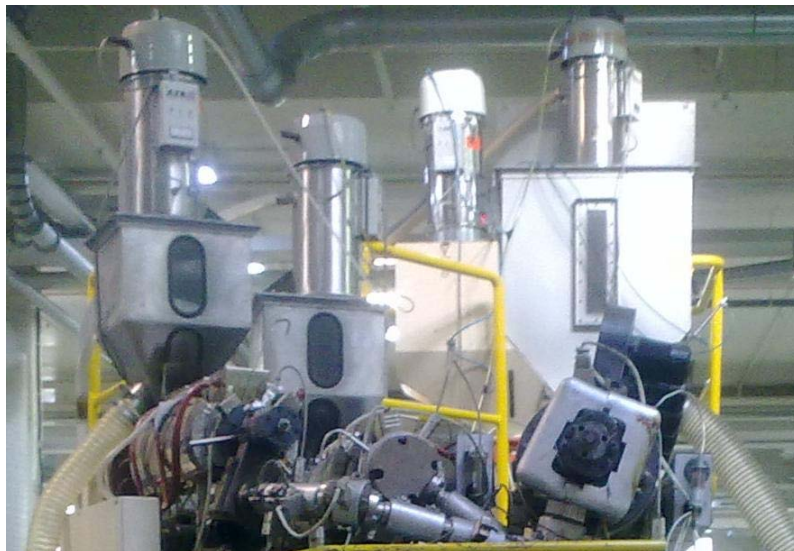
Extrusion coating machine hoppers. (Photograph Mikko Ketonen 2011)
